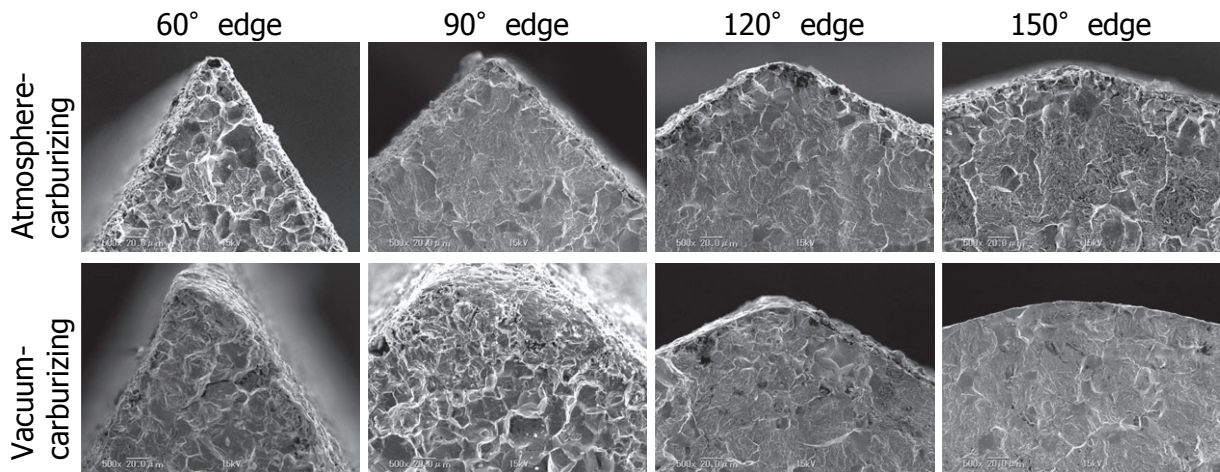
SEM images for fracture surface of atmosphere-carburized and vacuum-carburized specimens.
